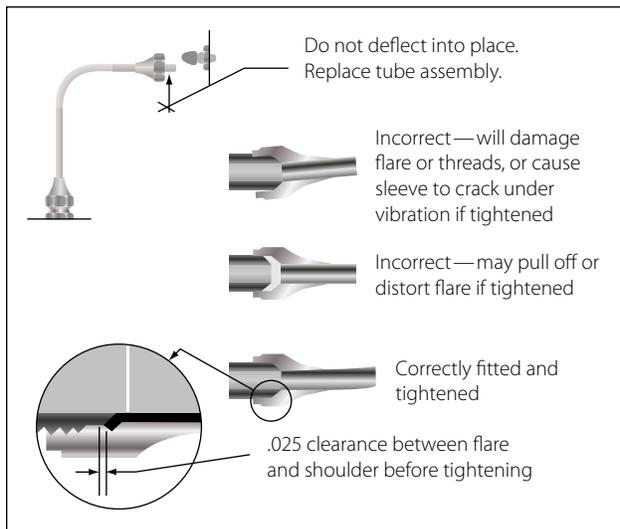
Correct and incorrect methods of tightening flared fittings.
